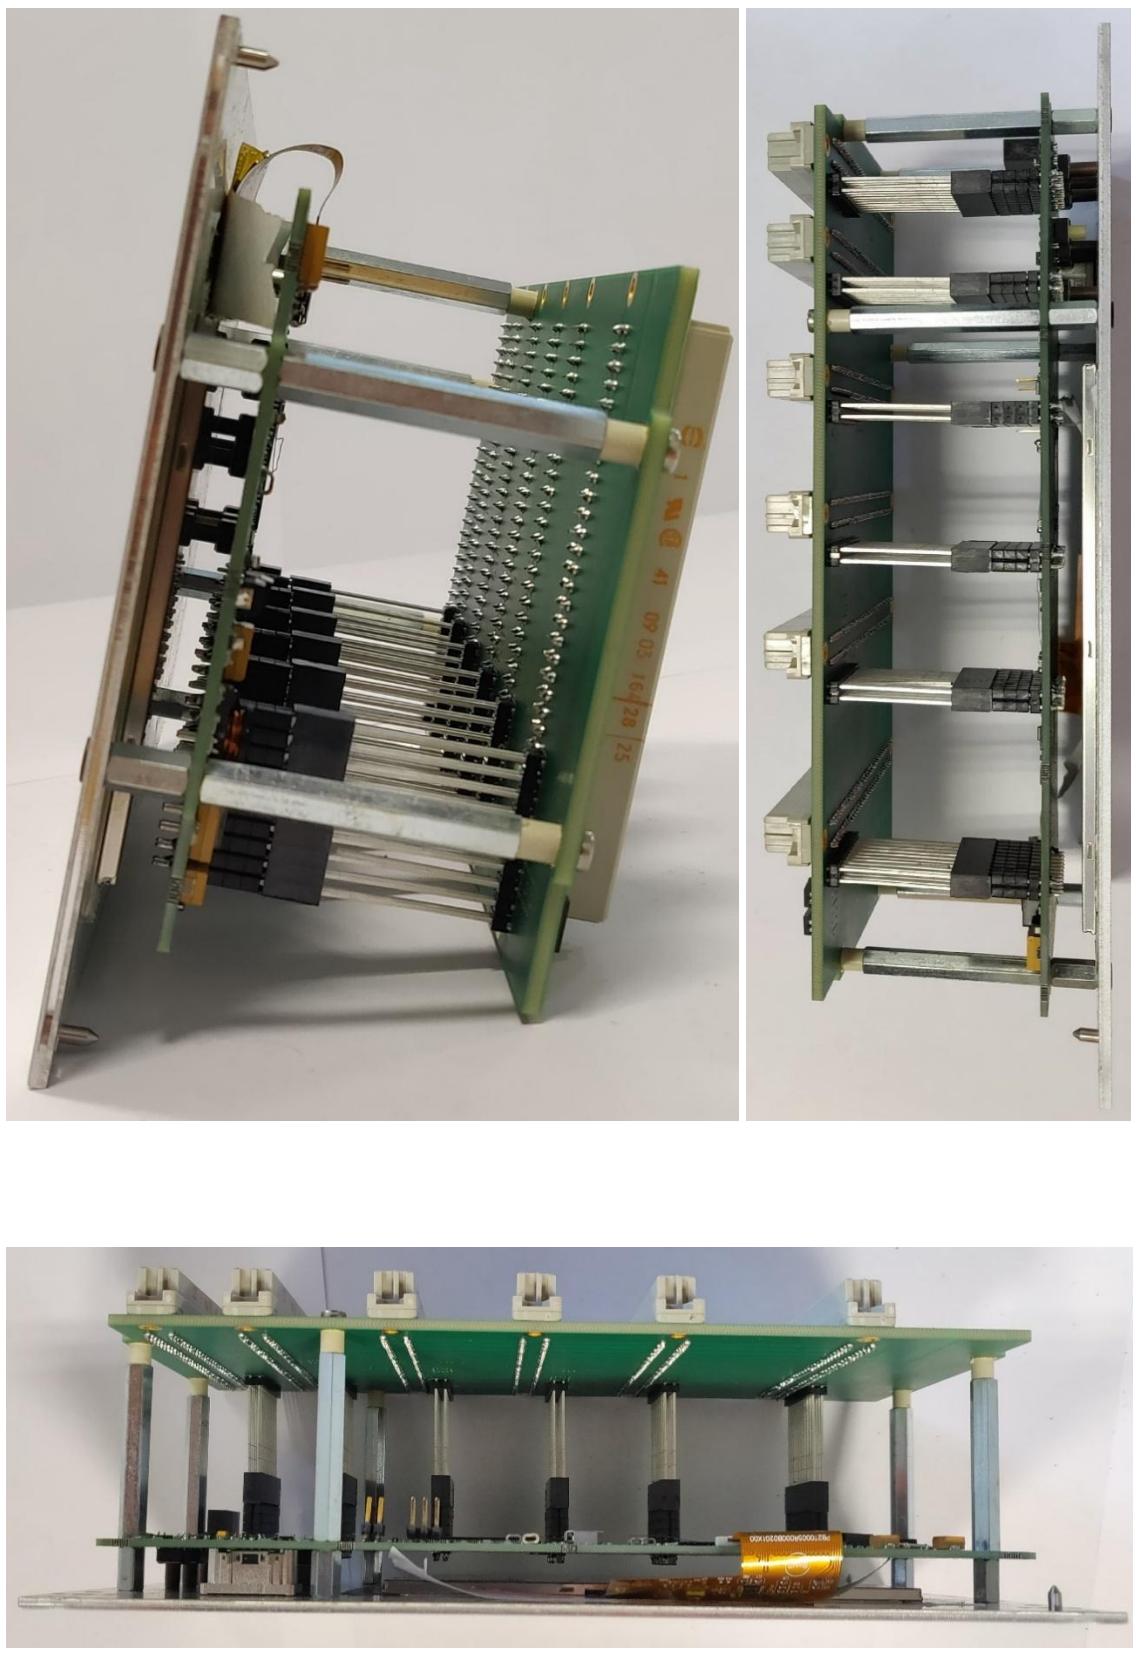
The VGC controller with mounted the backplane board (side view) [100].
